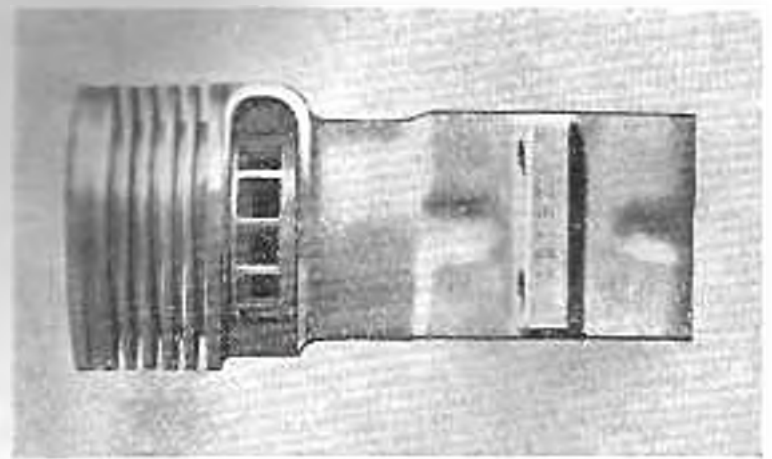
Shows modification to a late 1949 Redhead .29 crankcase and cylinder liner.
